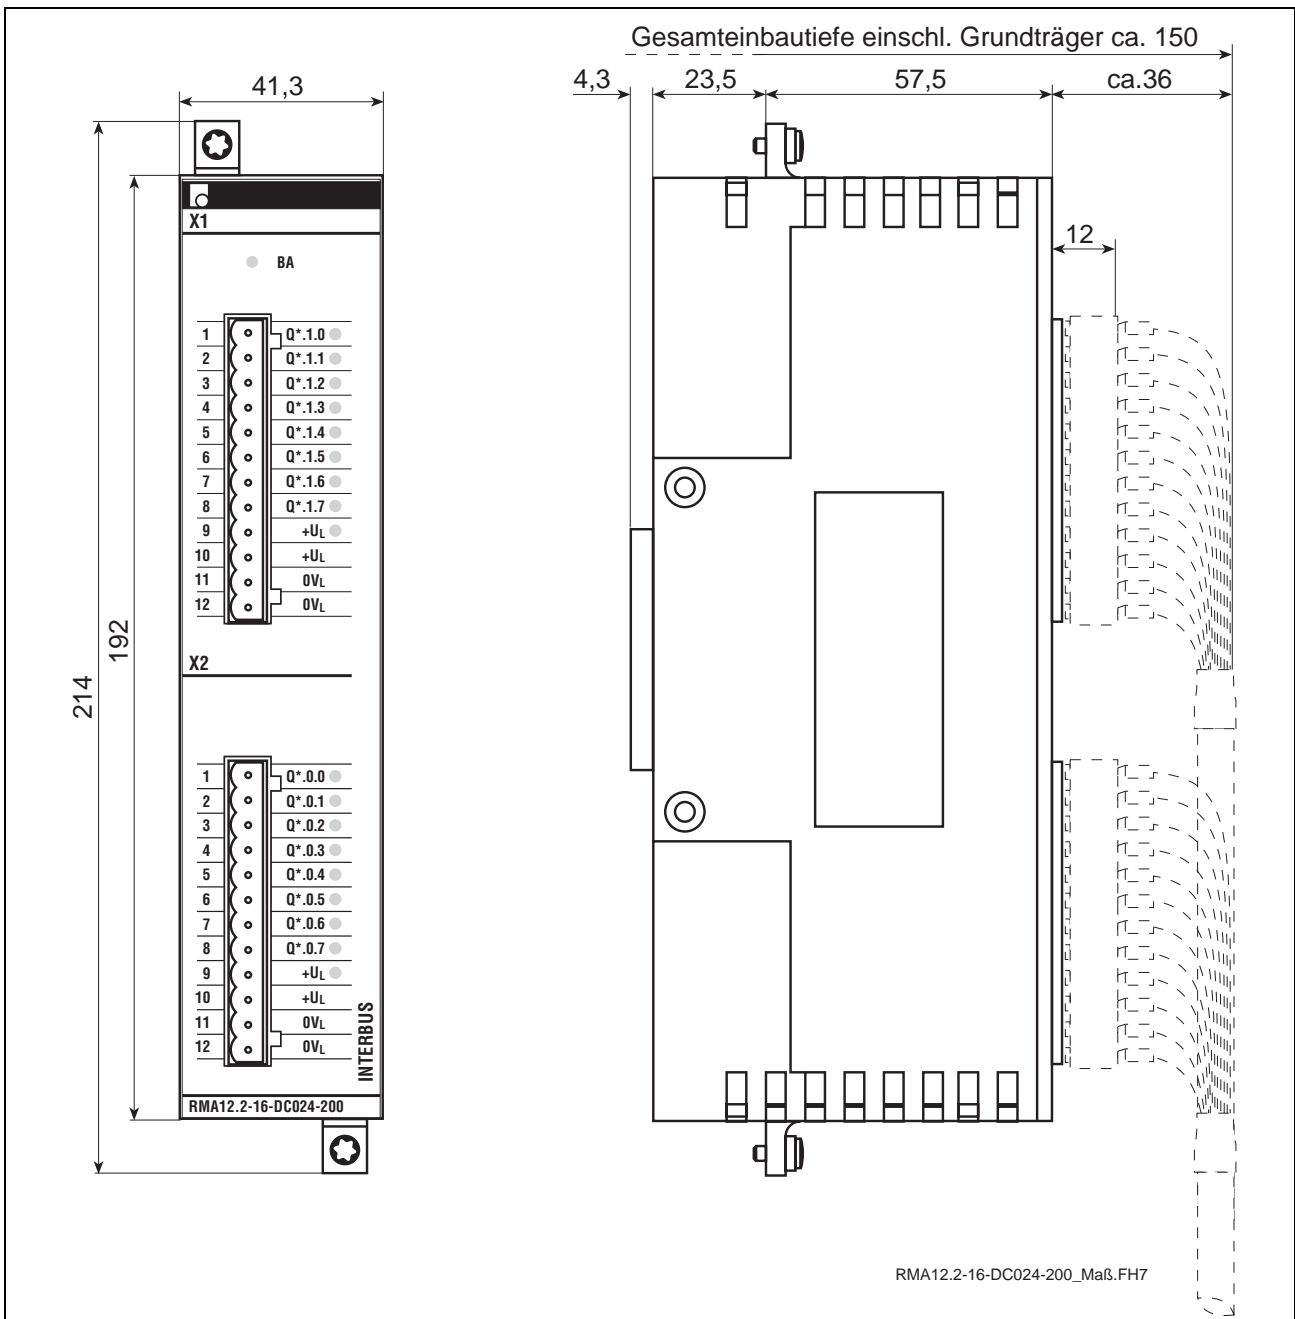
Mounting dimensions of RMA12.2-16-DC024-200
